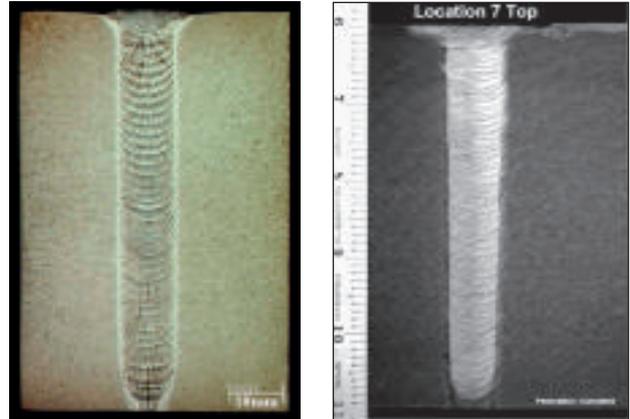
Macrographs of welds performed with a narrow gap torch. Left: Weld bead deposited using a single bead per layer technique in the 5G position. Right: Weld beads deposited using a two bead per layer technique in the horizontal position. This technique results in more favorable grain structure.
